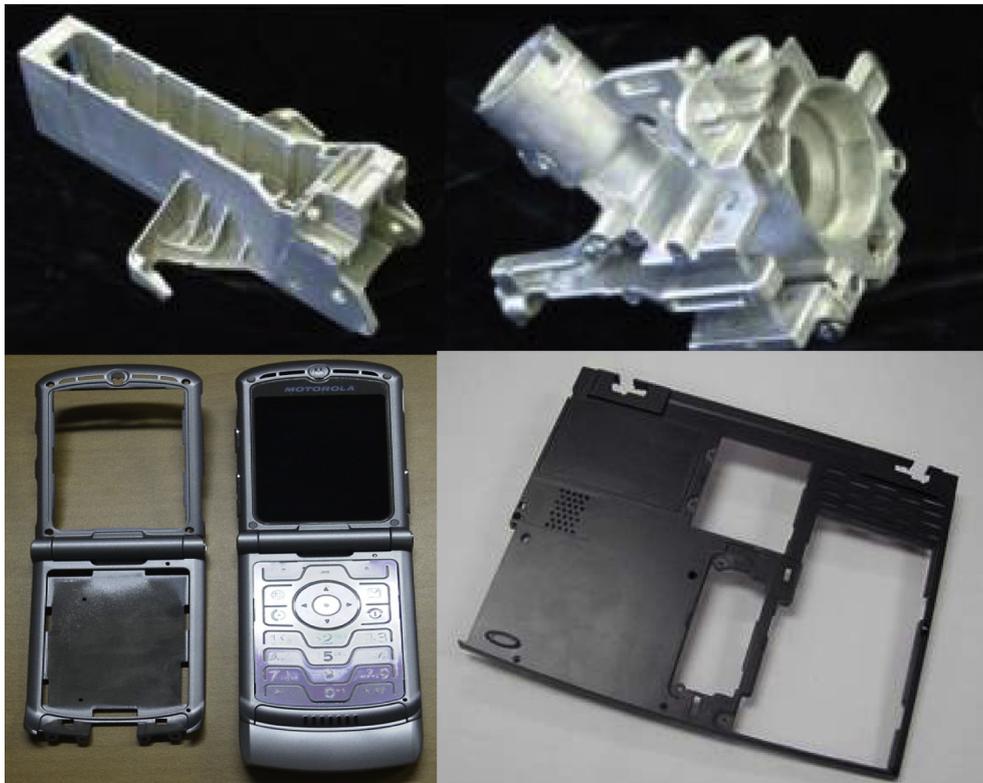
Typical magnesium parts made by hot chamber die casting process (Courtesy of Contech US, LLC and Foxconn Technology Group, China).
